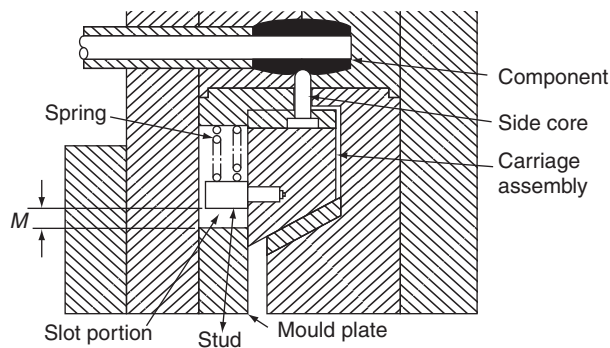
Dog-leg cam method of actuating side core assembly.
